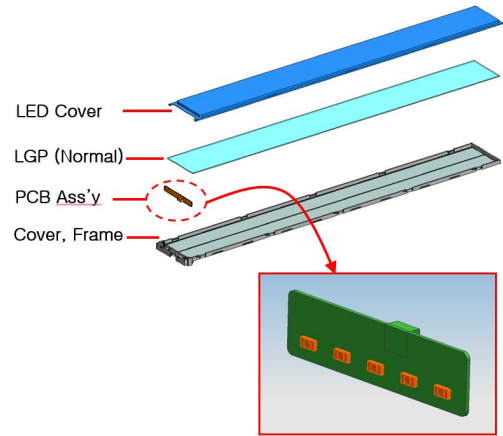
3D parts drawing of current LED lighting for refrigerator
